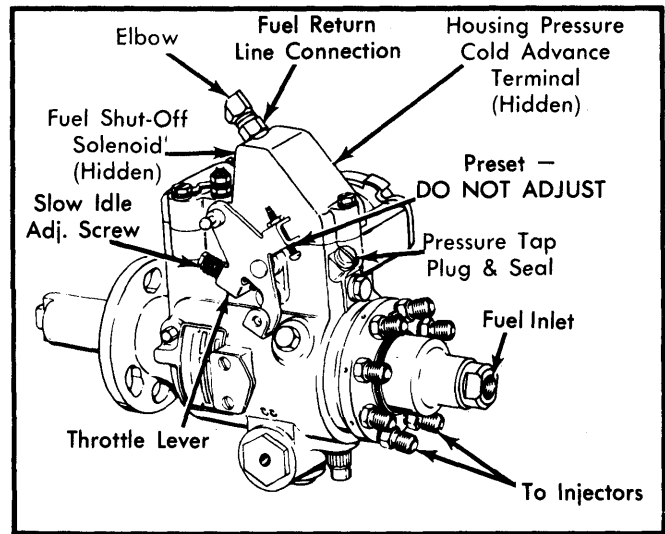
Diesel Injection Pump (Roosa-Master Type Shown - CAV Type Similar)
